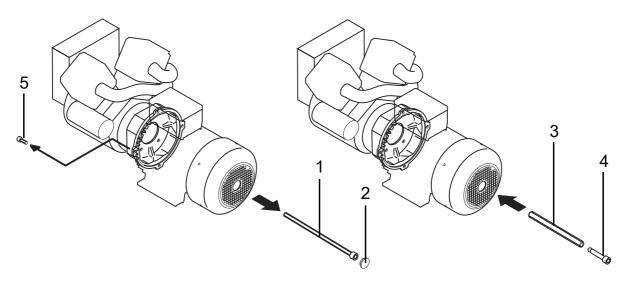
Disassembly of brushless single-bearing generators with tension bolts (1)
